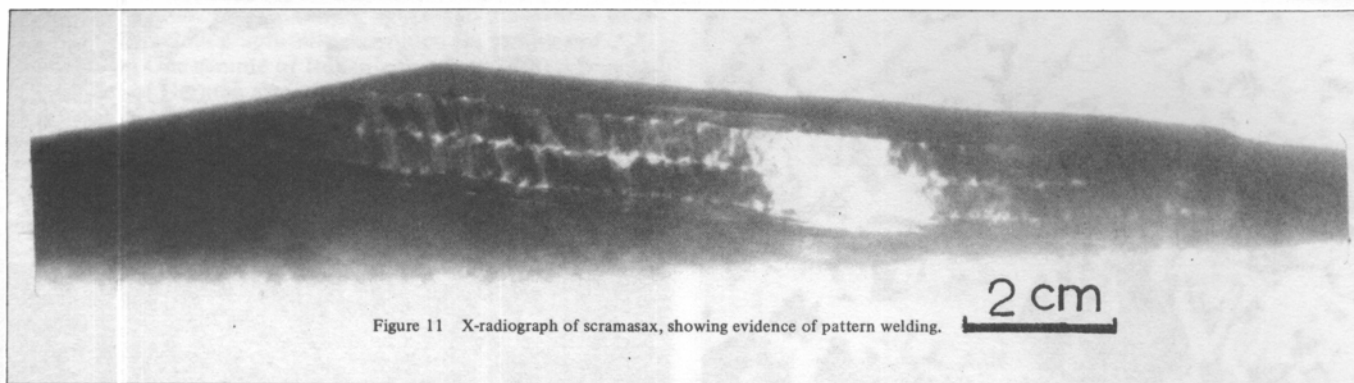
X-radiograph of scramasax, showing evidence of pattern welding.
